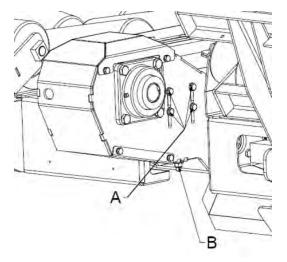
Adjusting the Pusher Transmission Chain Tension
